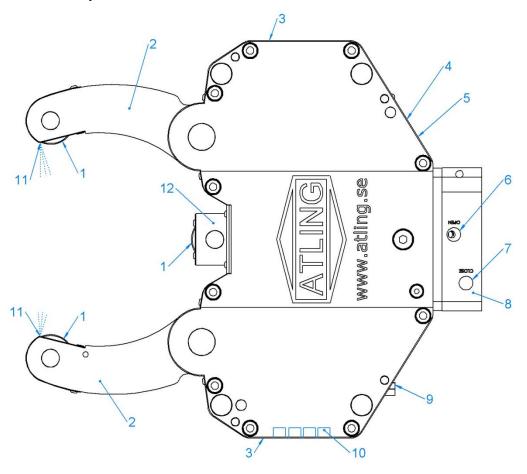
Steady Rest with built-in cylinder and pressure booster - AXI, ASI series
